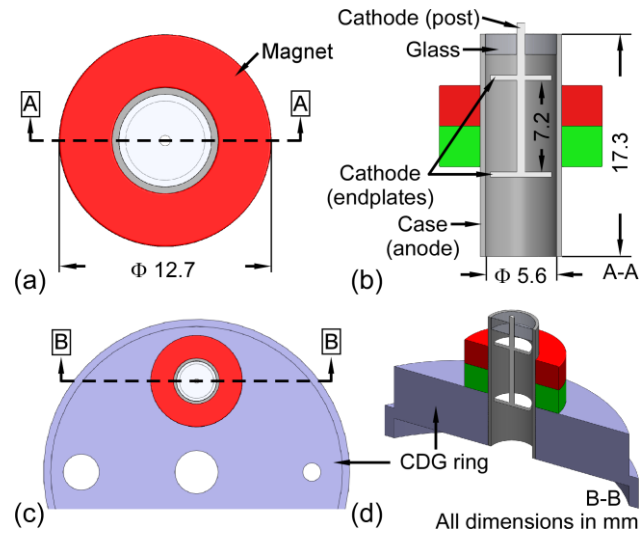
Schematic of Design M.MF geometry (a) 3D, (b) A-A section. Relative position between Design M.MF and CDG ring after assembly (c) top, (d) B-B section.
